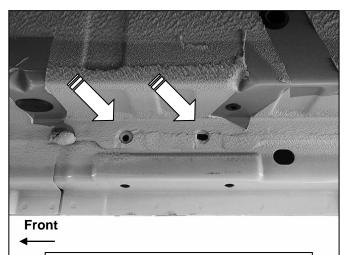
Push Bracket up tight against body panel. Mark location of bottom slots onto pinch weld
